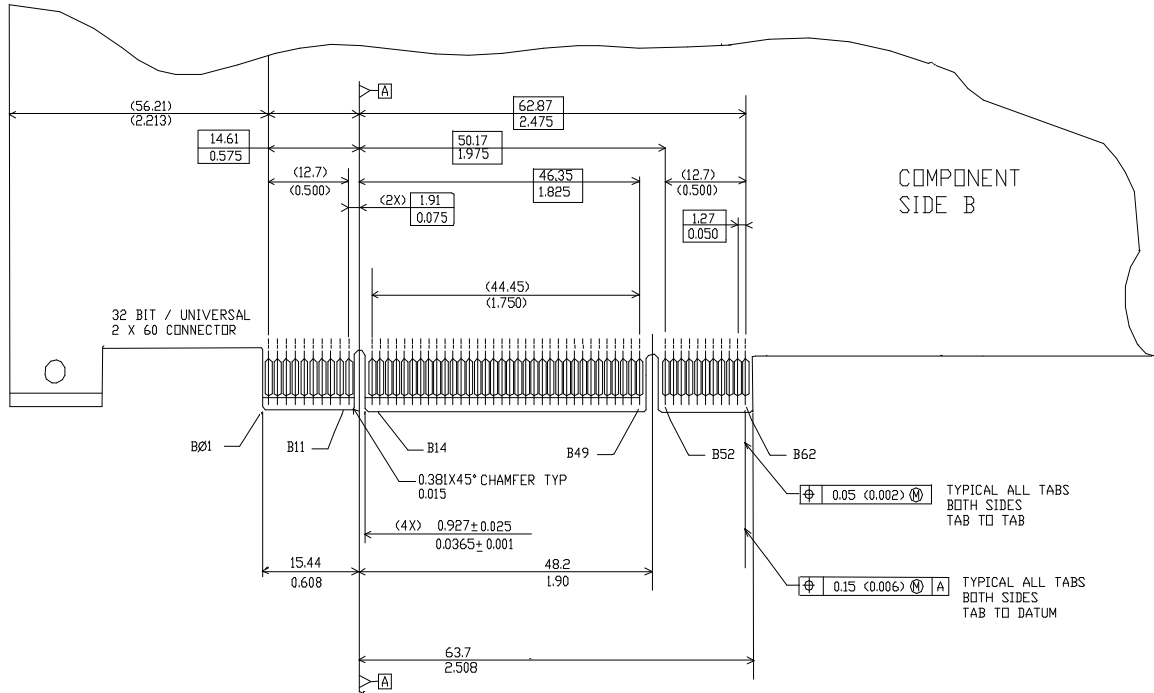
Universal 32-bit Card Edge Connector Dimensions and Tolerances
